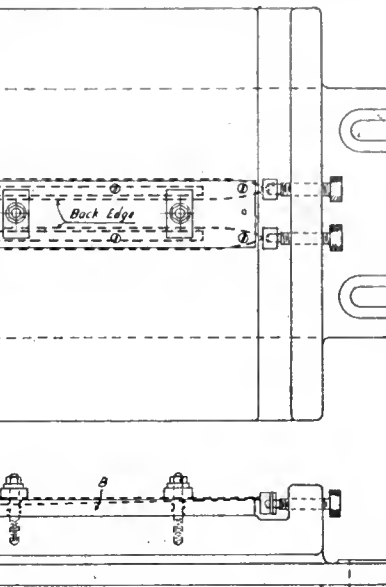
LOCATING BLADES FROM BACK EDGE WHILE MILLING CUTTING EDGE.
